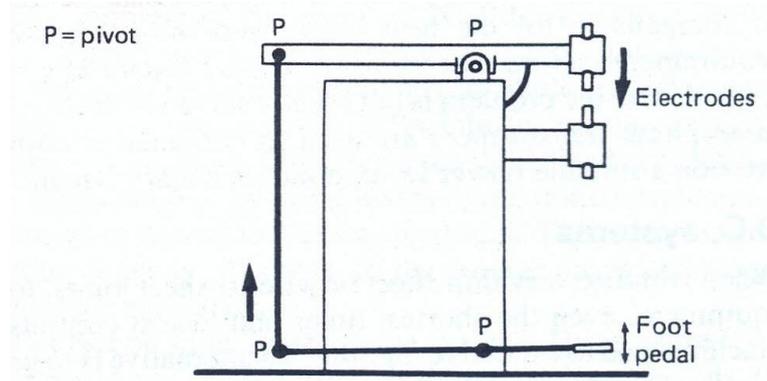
(a) rocker-arm spot welding machine (Gourd L. M. 1995)
